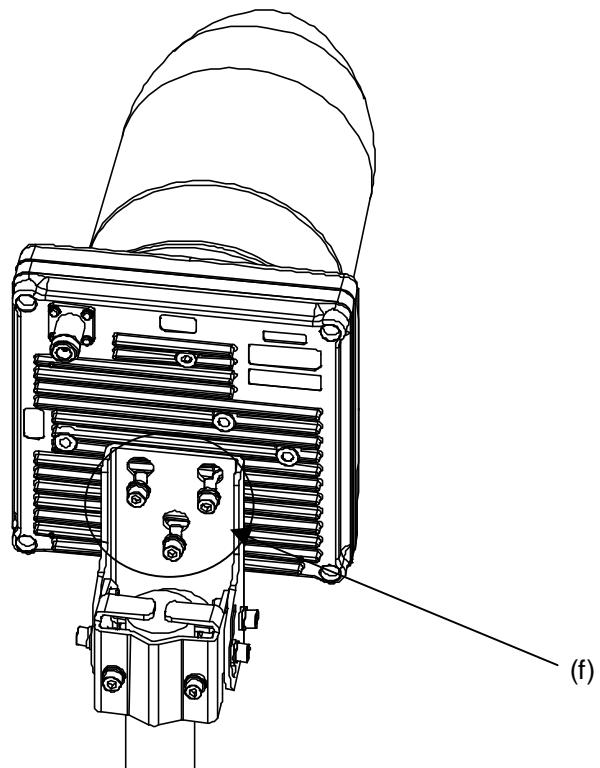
Installing the AP-RFU on the Mounting Bracket
